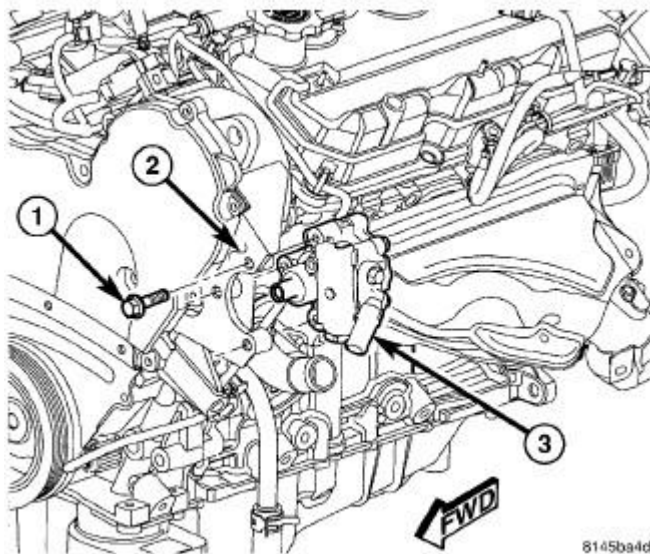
POWER STEERING PUMP - 2.7L/3.5L
